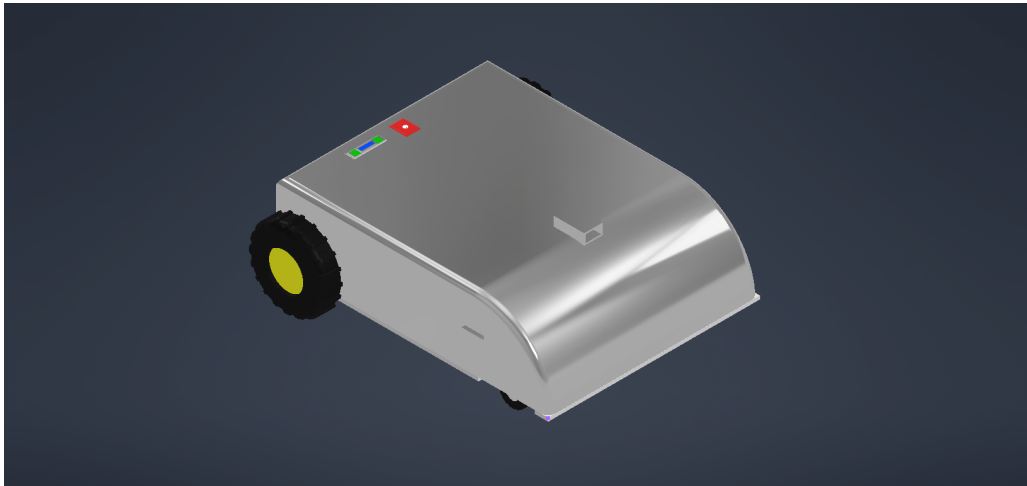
Initial automated lawn mower design showing basic chassis structure, motor placement, and cutting mechanism layout.
